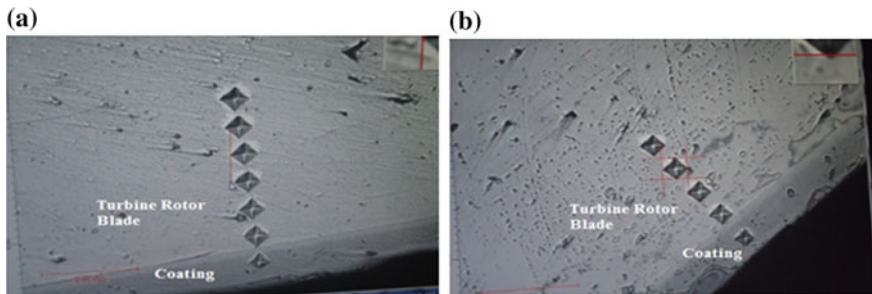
Microhardness impressions on turbine rotor blades showing coating and blade a electro-chemical machining b CNC milling
